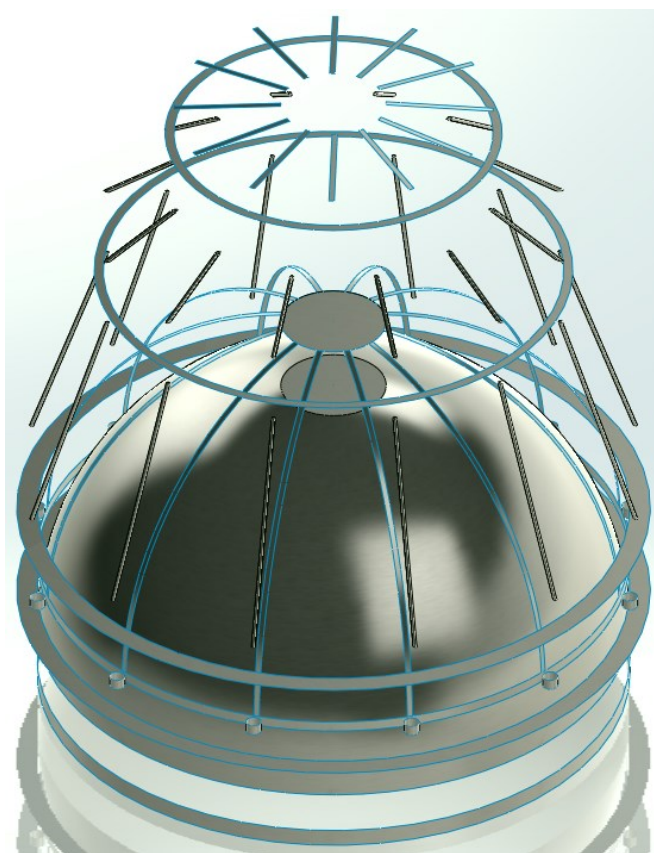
Reaction Chamber with Thrust Structure, Induction Loop, and Field Coils Exploded View
